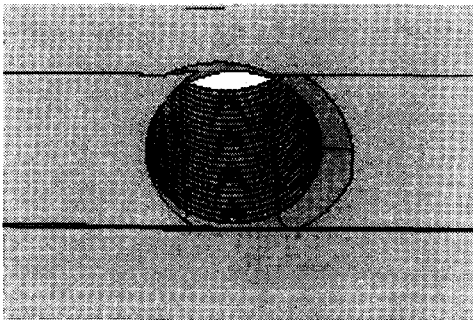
(c) Shape of helical grooved vent (Threaded hole)
